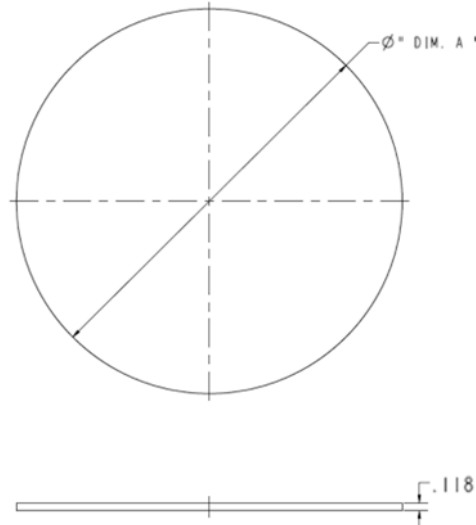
Engineering Drawing (128Y-1720912) of the Following HEU Plates: HEU 15/0 and 6/0 (Dimensions in Inches). Not an original drawing.
